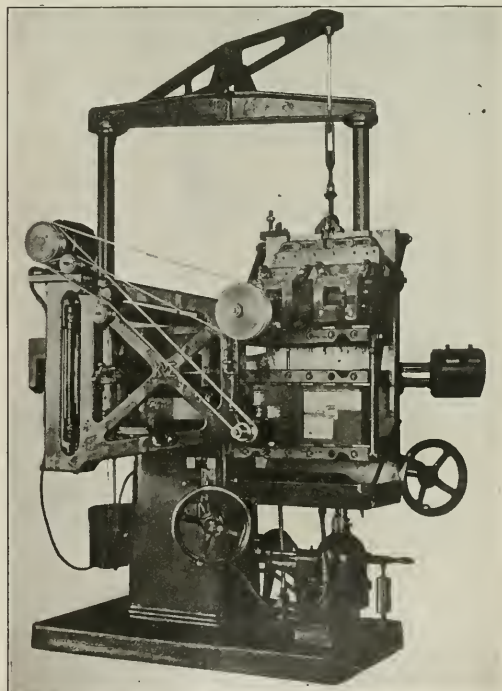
SENSITIVE DUPLICATING MACHINE CAPABLE OF FAIRLY HEAVY AND DEEP CUTTING
